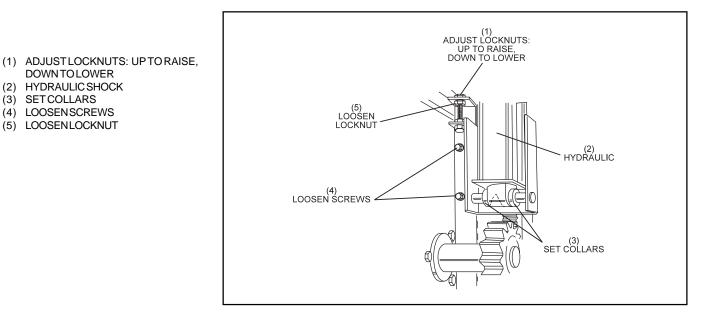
Adjusting Stroke Limiter Mounting Bracket.
